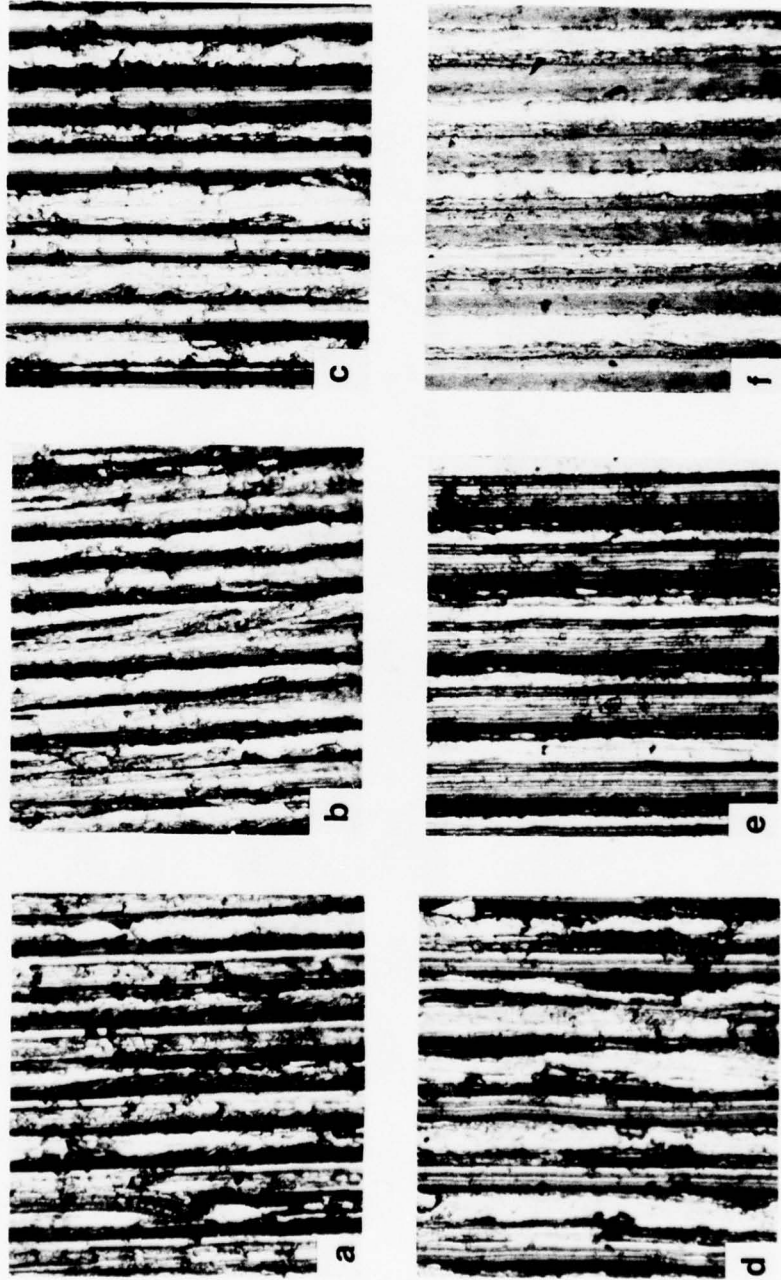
Grooves formed on AISI 1095 steel specimens: (a) 70, (b) 90, (c) 100, (d) 110, (e) 120 (f) 140-degree conical tool.
